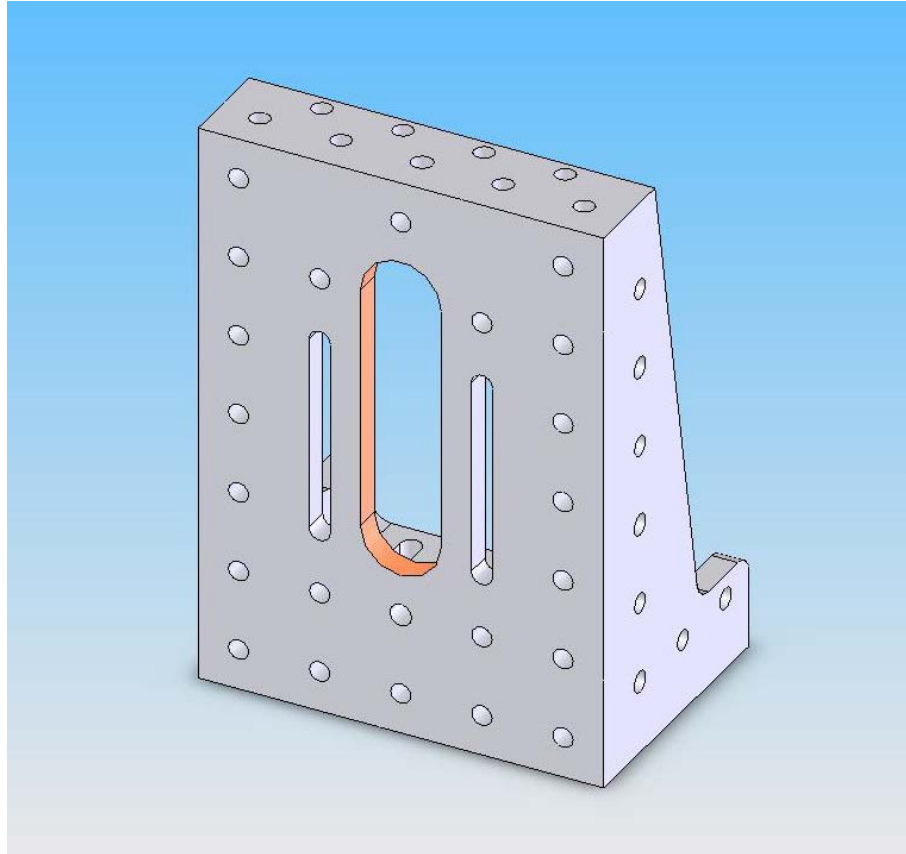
CAD Drawing of rear right angle bracket with one Inch slot
